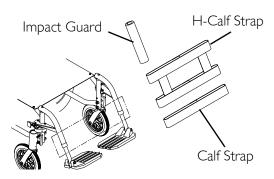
Installing Impact Guards/Calf Strap/H-Calf Strap
